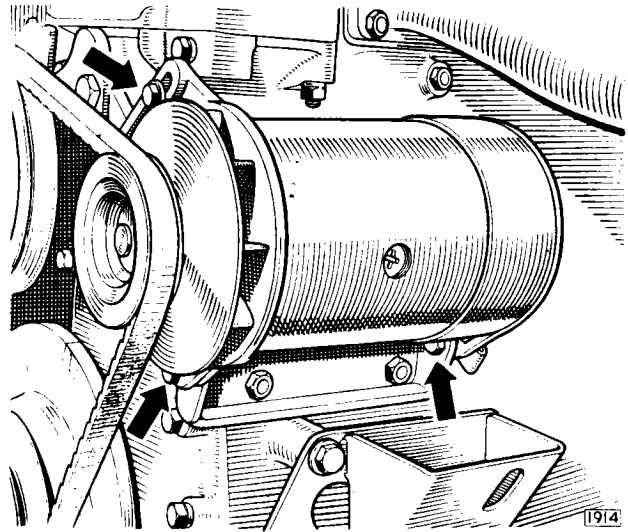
To adjust the fan belt tension, slacken the three dynamo mounting bolts and move the dynamo to the desired position.
